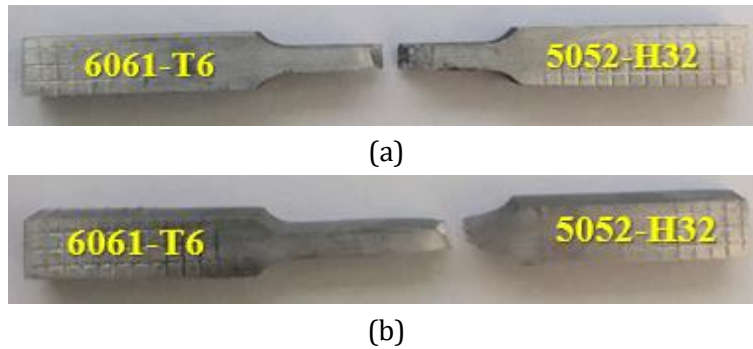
Fractured micro-tensile specimens: FSW-AW specimen (b) PWHT specimen
